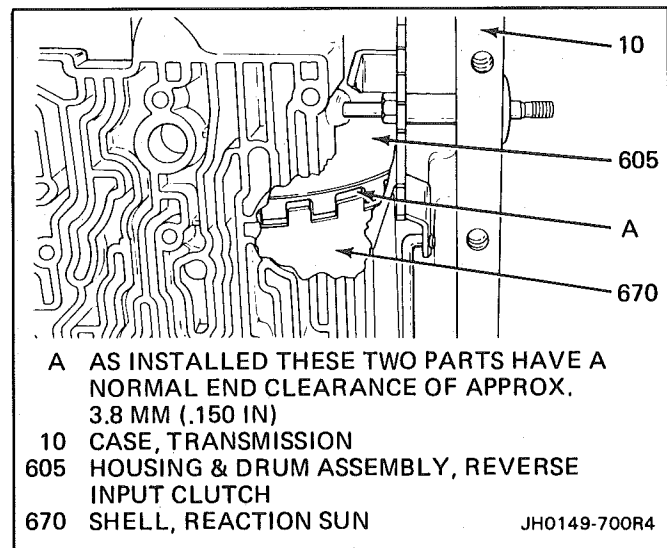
Clearance Between Reverse Input Clutch and the Sun Gear Shell
